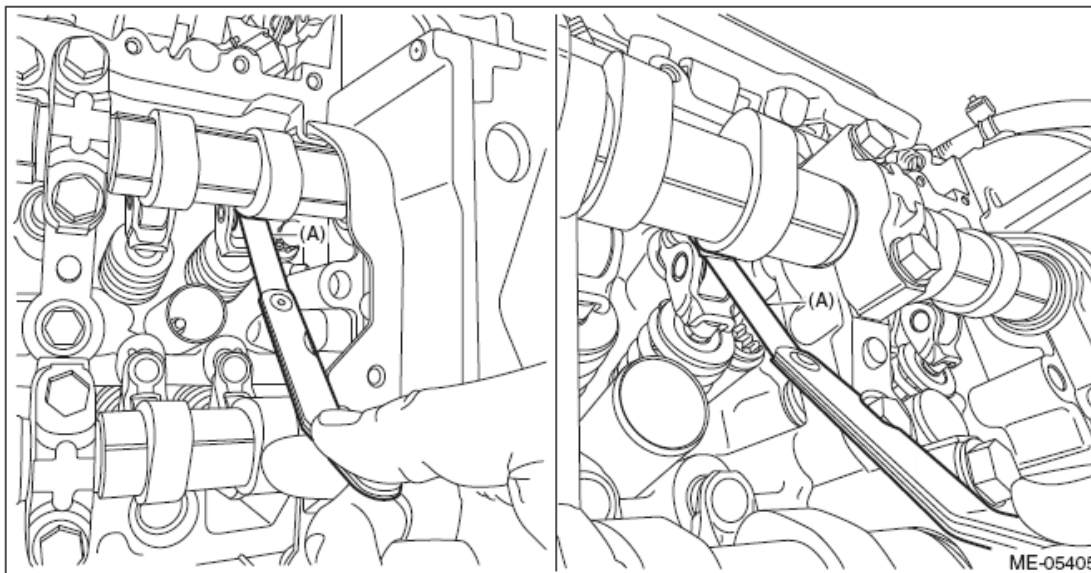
Checking No. 1 And No. 3 Cylinder Cam Clearance
